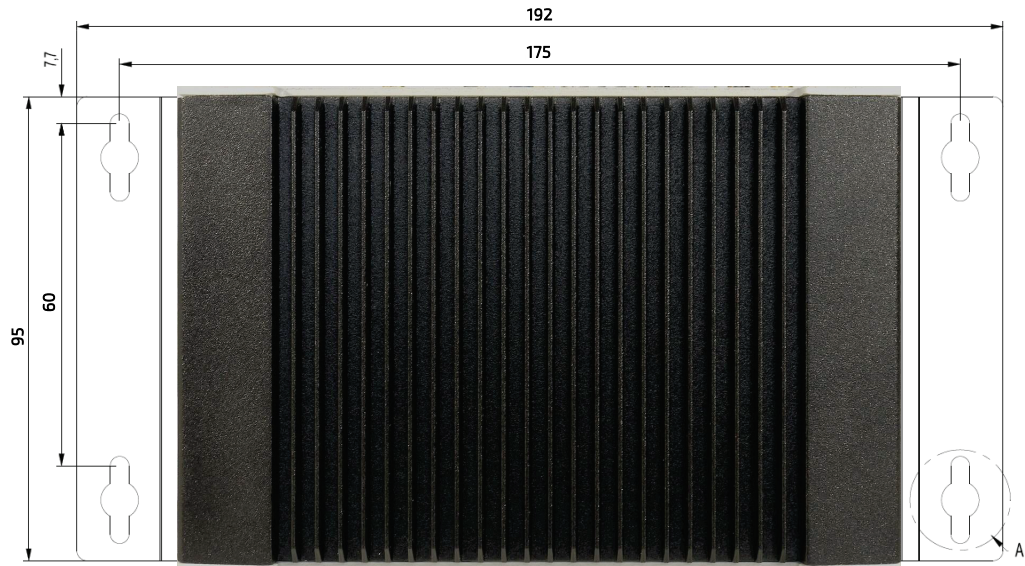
Dimensions: front side (with wall/table mounting brackets)
